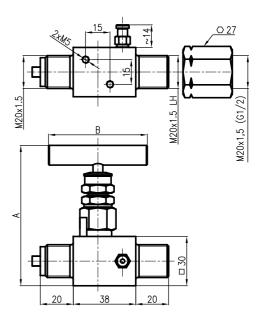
MANOMETRIC TESTING VALVE 967 51 ..., dimensional drawing, scheme, application
